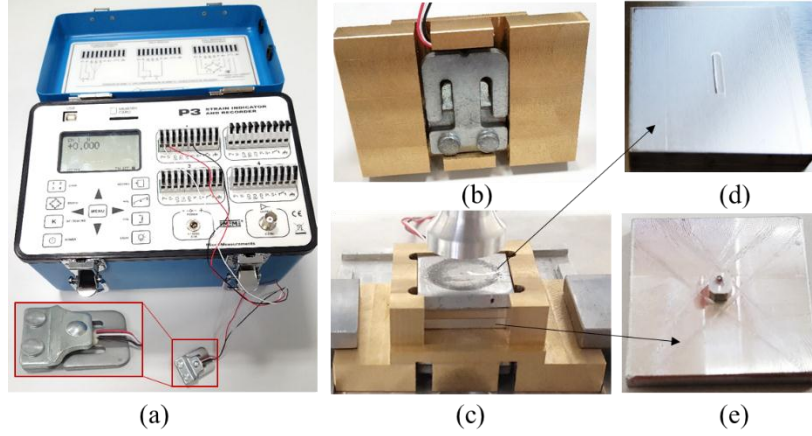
(a) Load cell mounted to strain indicator and recorder, (b) bottom view of load cell, (c) support plate, PMMA and mold arrangement, (d) mold, (e) support plate.
